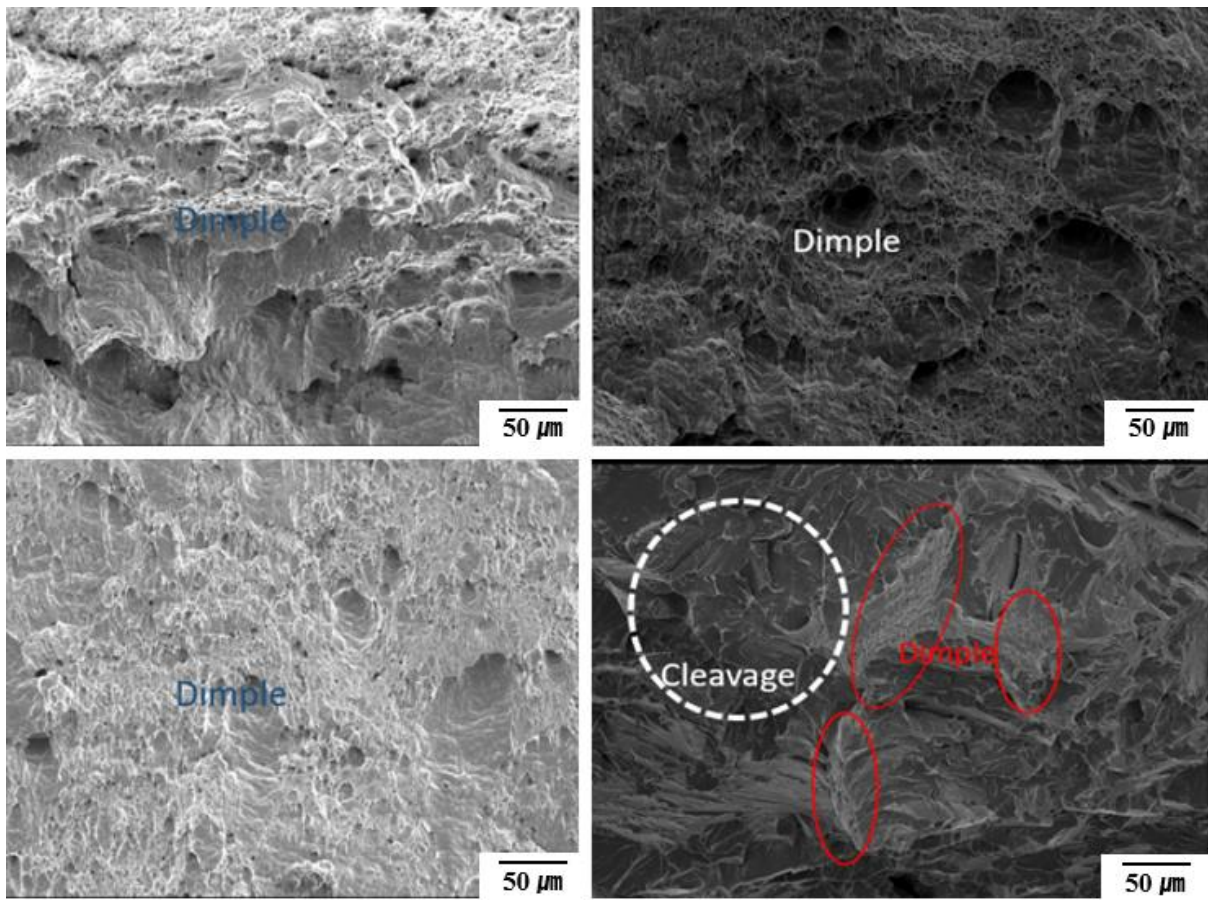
SEM fractographs of the fractured Charpy impact tests at -40°C for the Base(H) specimen
